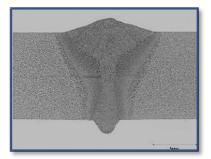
Butt joint section in DH36 steel in 10 mm thickness welded by laser-hybrid process.
